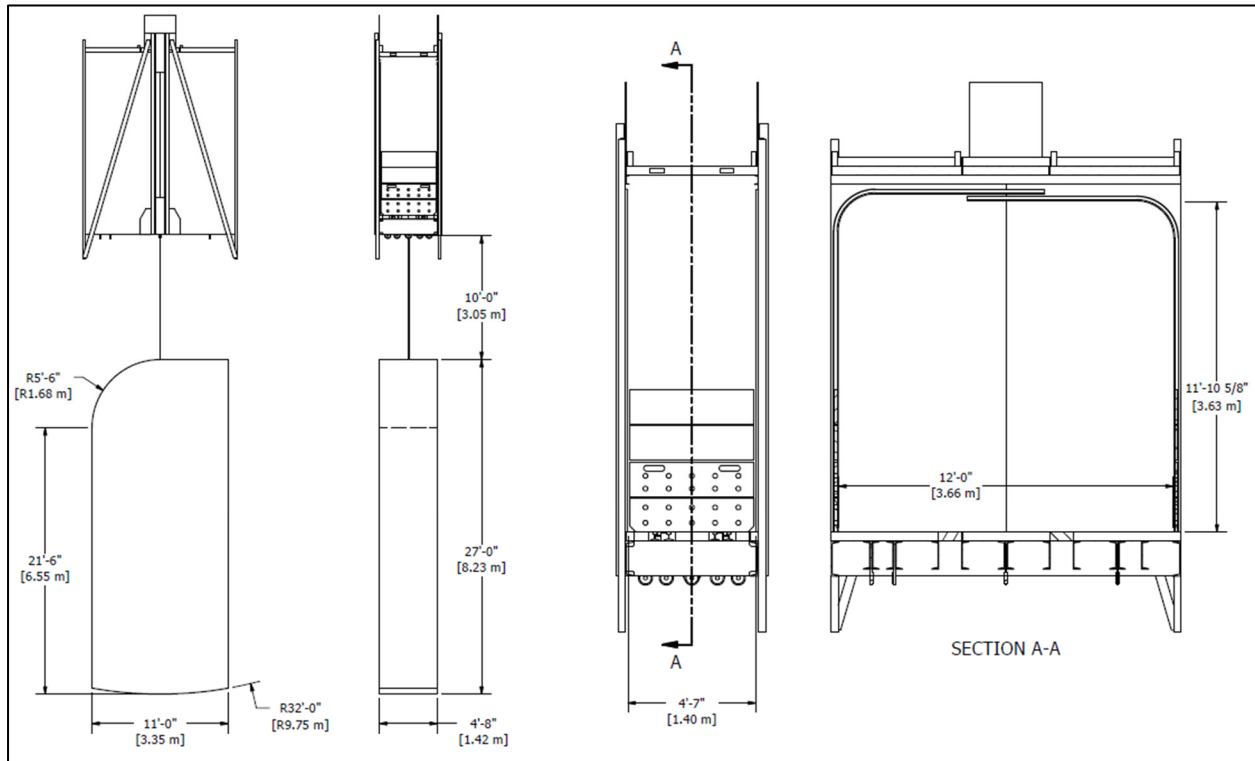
Ross Cage & under-sling clearance dimensions (standard 10 ft sling)
